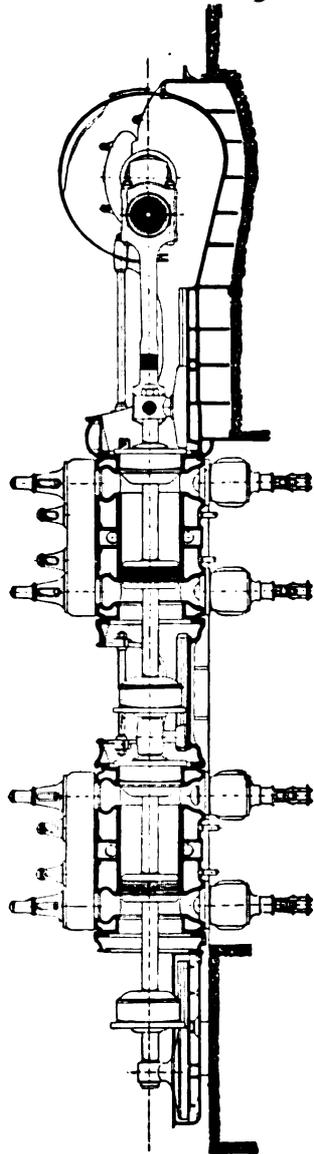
Nürnberg Engine with back Cylinder covers removed.
